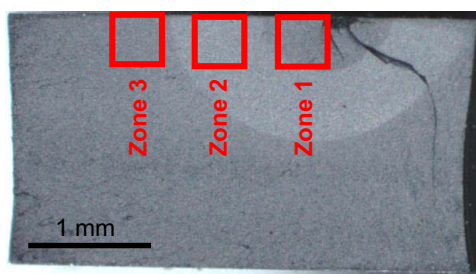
IFM surface roughness analysis of the fracture surface of specimen Control 3.
